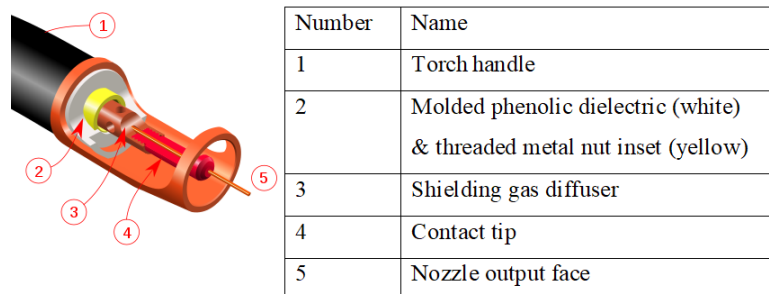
The structure of MIG welding torch (Car cooling system, 2020)
